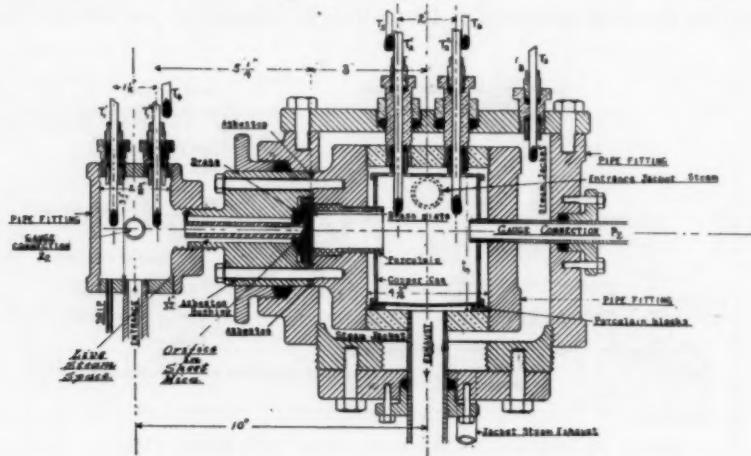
THROTTLING CALORIMETER NO. 6 FOR TEST J
